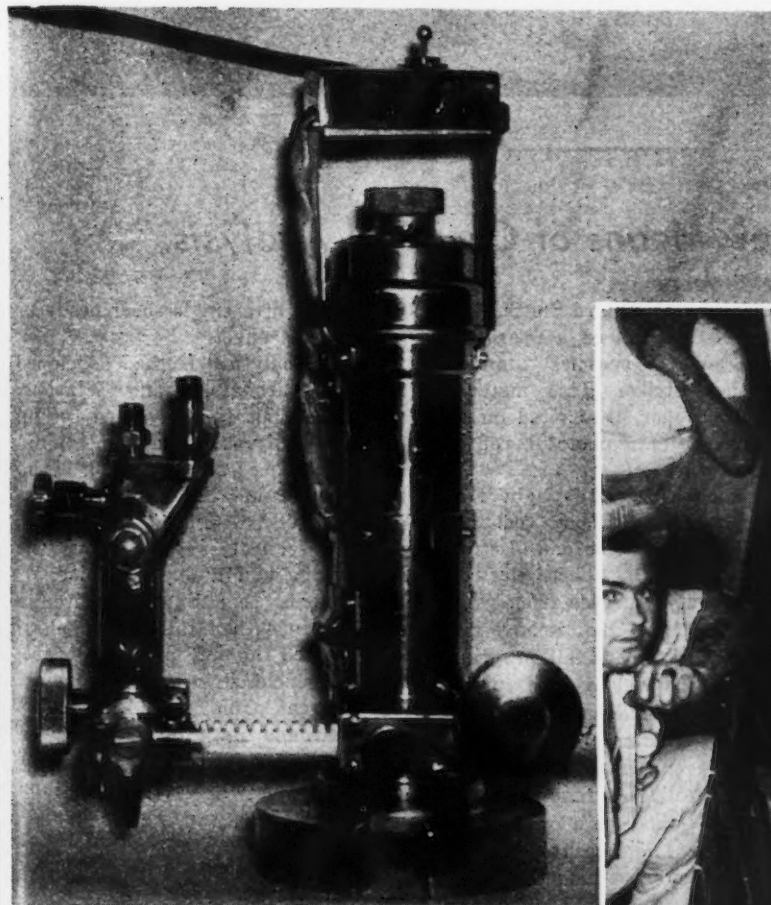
Side view of cutting-scribing machine shown in Fig. 3
